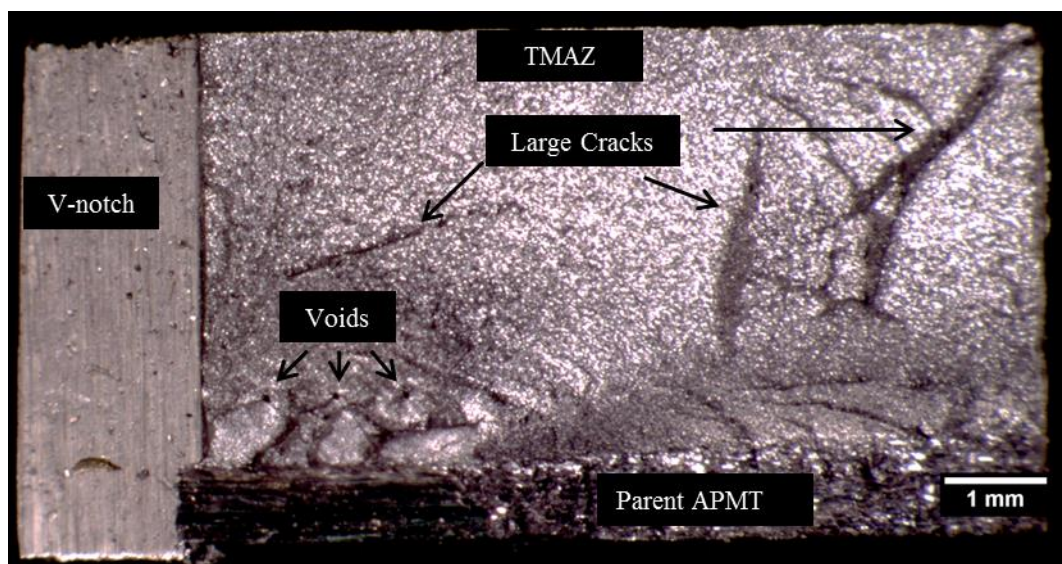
Optical macrograph of the Charpy v-notch impact fracture surface of W30 as welded sample.
